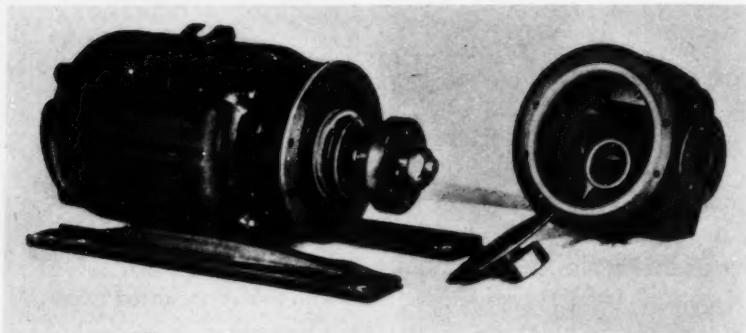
SEMI-HERMETIC COMPRESSOR PARTS
